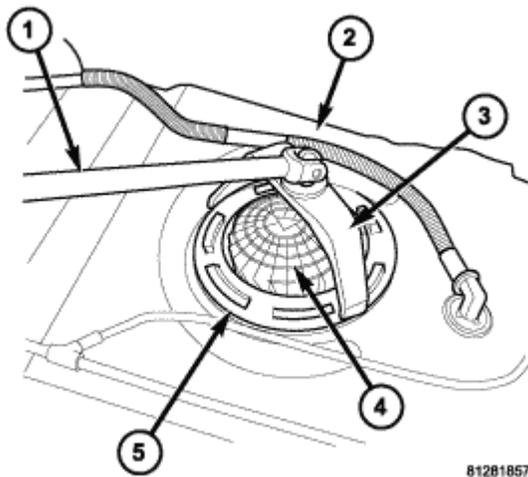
Identifying Drive Breaker Bar, Lockring Remover/Installer Tool 9340 & Lockring
